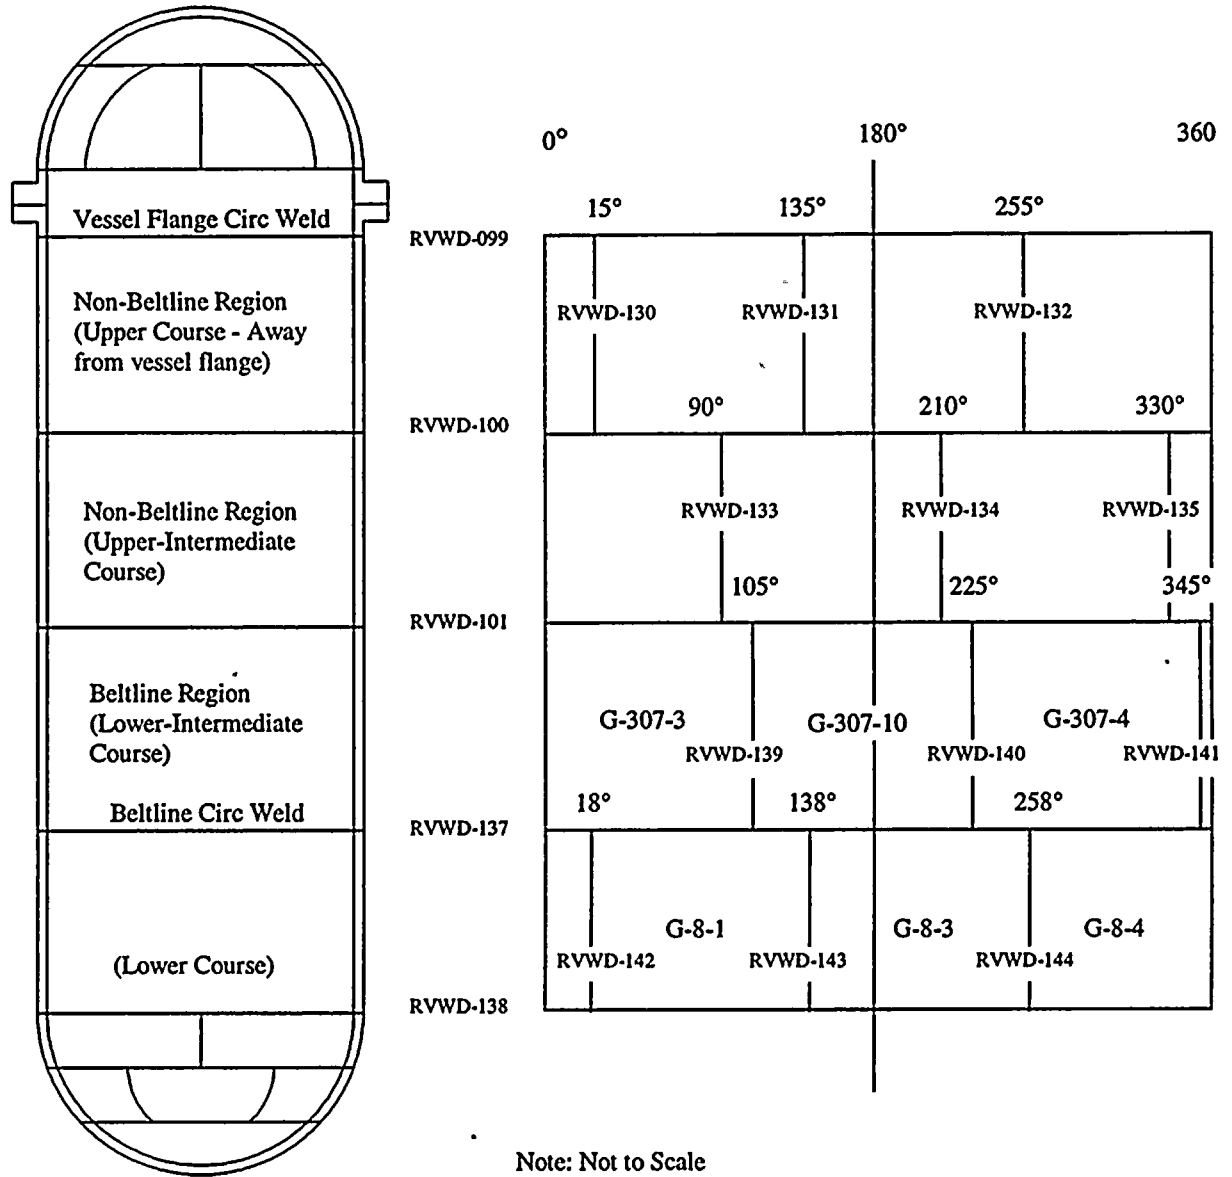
Nine Mile Point Unit 1 vessel weld regions for flaw evaluation.
